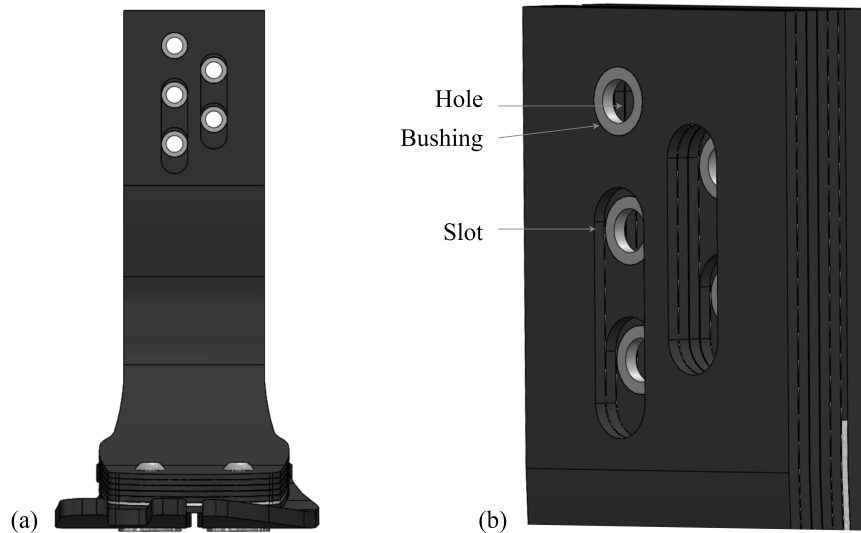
Leaf spring design. (a) Carbon fiber composite leaf spring assembly consists of a ground spring and 5 parallel lockable springs. (b) Close up of slot/hole configuration. A pin driven by each locking actuator engages with the hole in the corresponding leaf spring.
